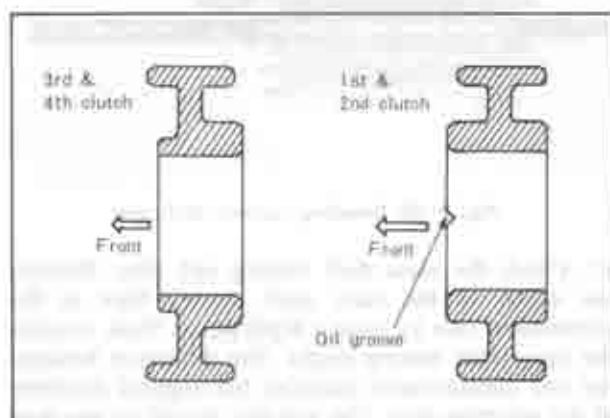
Installing clutch assembly (1st & 2nd)
